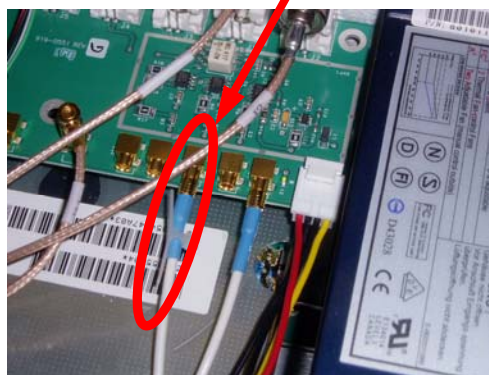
Move the 10 MHz Cable from J6 to J7 on the XLR-BNC I/O PCB Assembly (919-0551)
